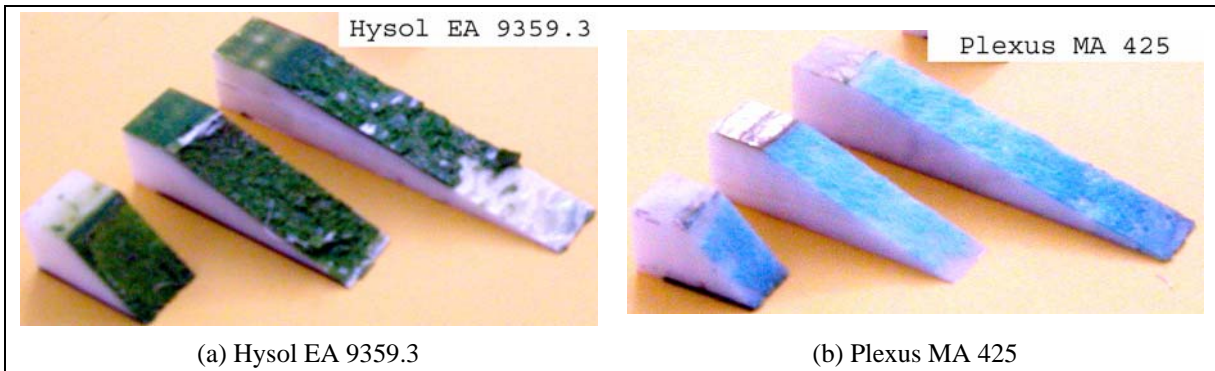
Fracture surfaces of scarf-repaired composite specimens under dynamic axial compression.
